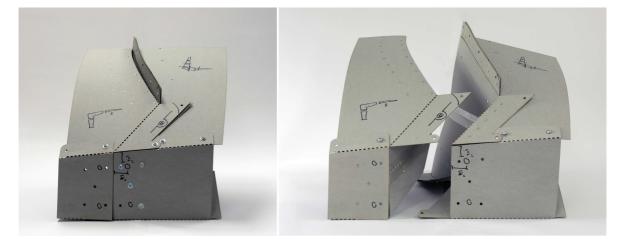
Prototype of sub-assembly joint; assembled position, open position
